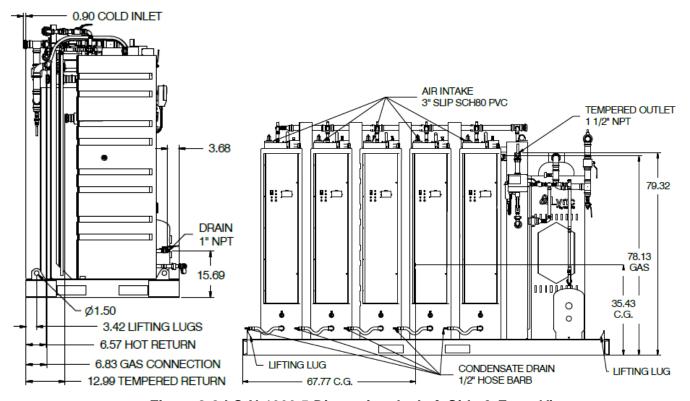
LC-N-1000-5 Dimensional – Left Side & Front View
